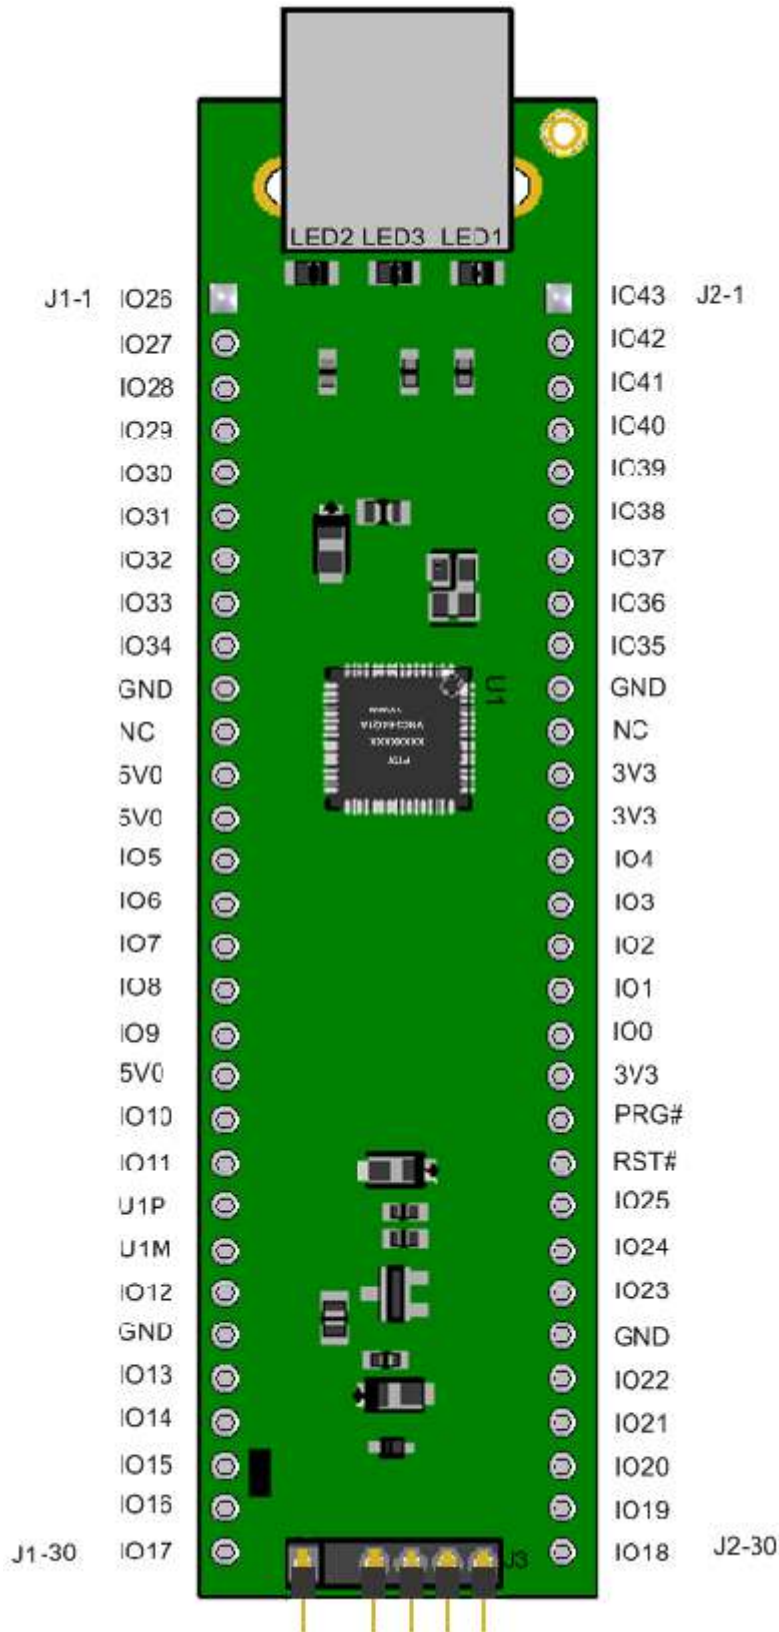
V2DIP1-64 Module Pin Out (Top View)
